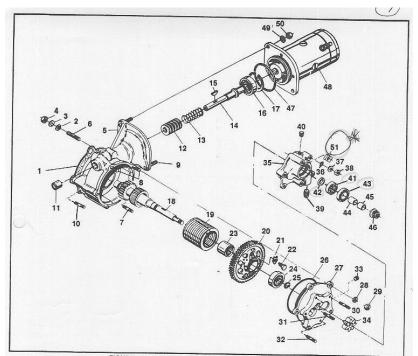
STARTER AND STARTER ADAPTER ASSEMBLY
